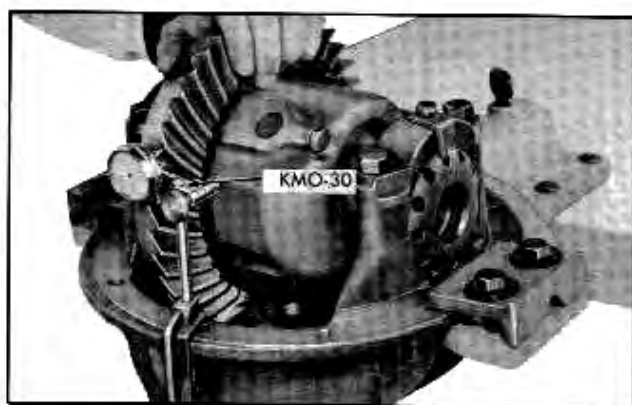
Checking Backlash With Indicator KMO-30 Set
